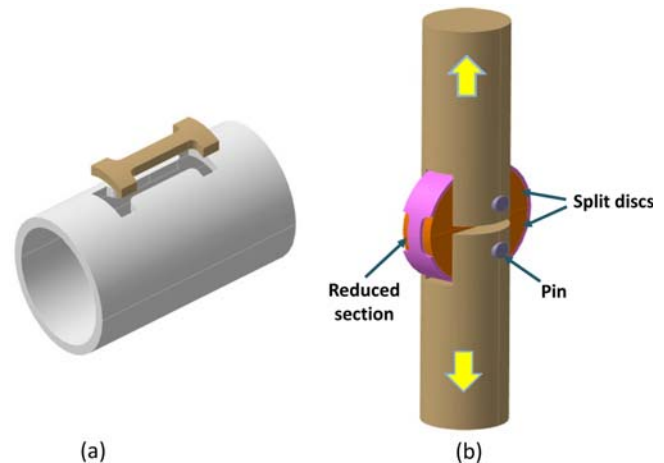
(a) Schematic of tensile test location in the axial direction and (b) schematic of the ring hoop tensile test fixture.
